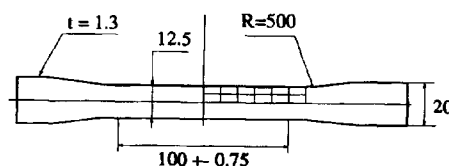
Test specimen of the GLARE® tensile test in mm.
